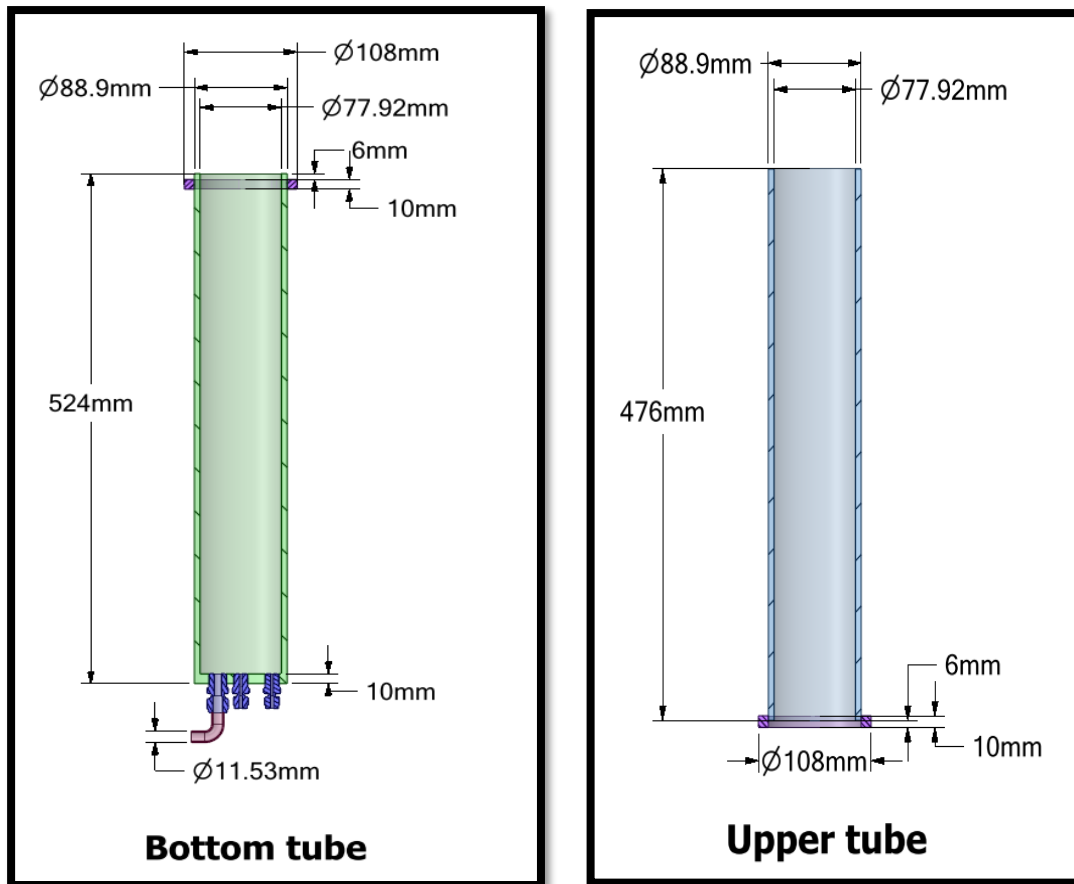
Detailed dimensions of the gasifier (bottom and upper tubes).
